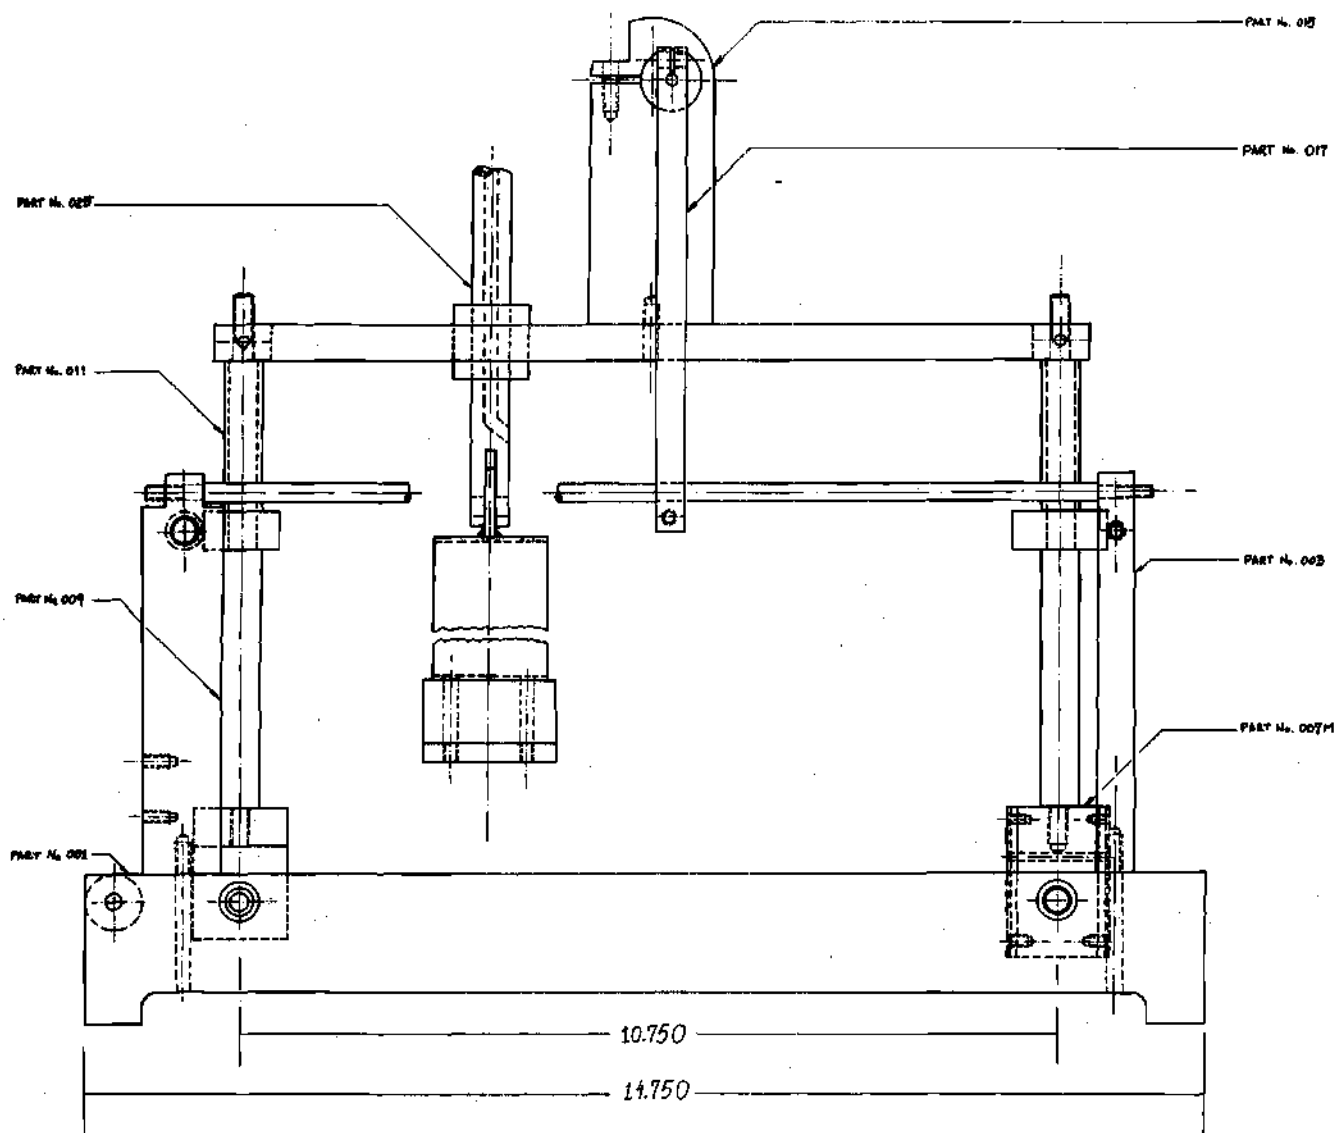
Ignition Source Scanning Apparatus Assembly: Front View
